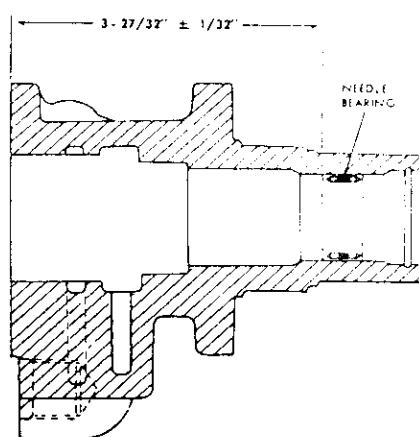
When renewing needle bearing in pump body, install same to dimension shown.
